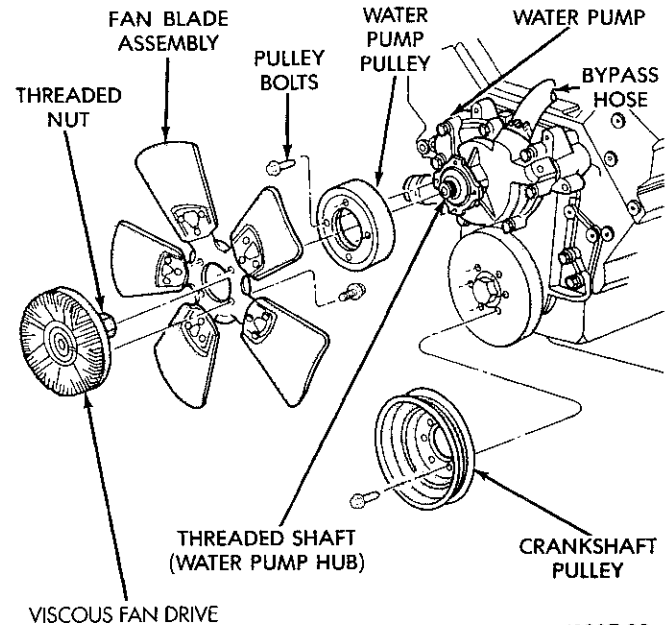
Fan Blade and Viscous Fan Drive—Typical
